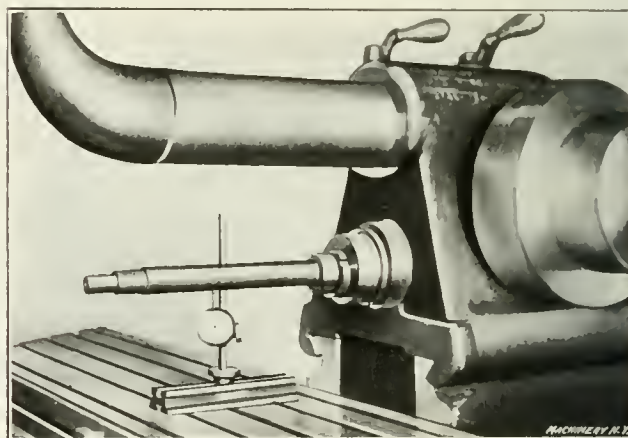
Testing Crosswise Adjustment of Milling Machine Table
